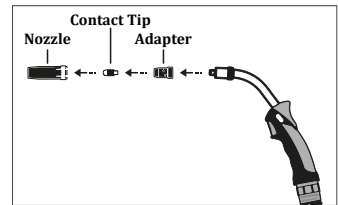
Separation of Nozzle and Contact Nozzle from the Torch
